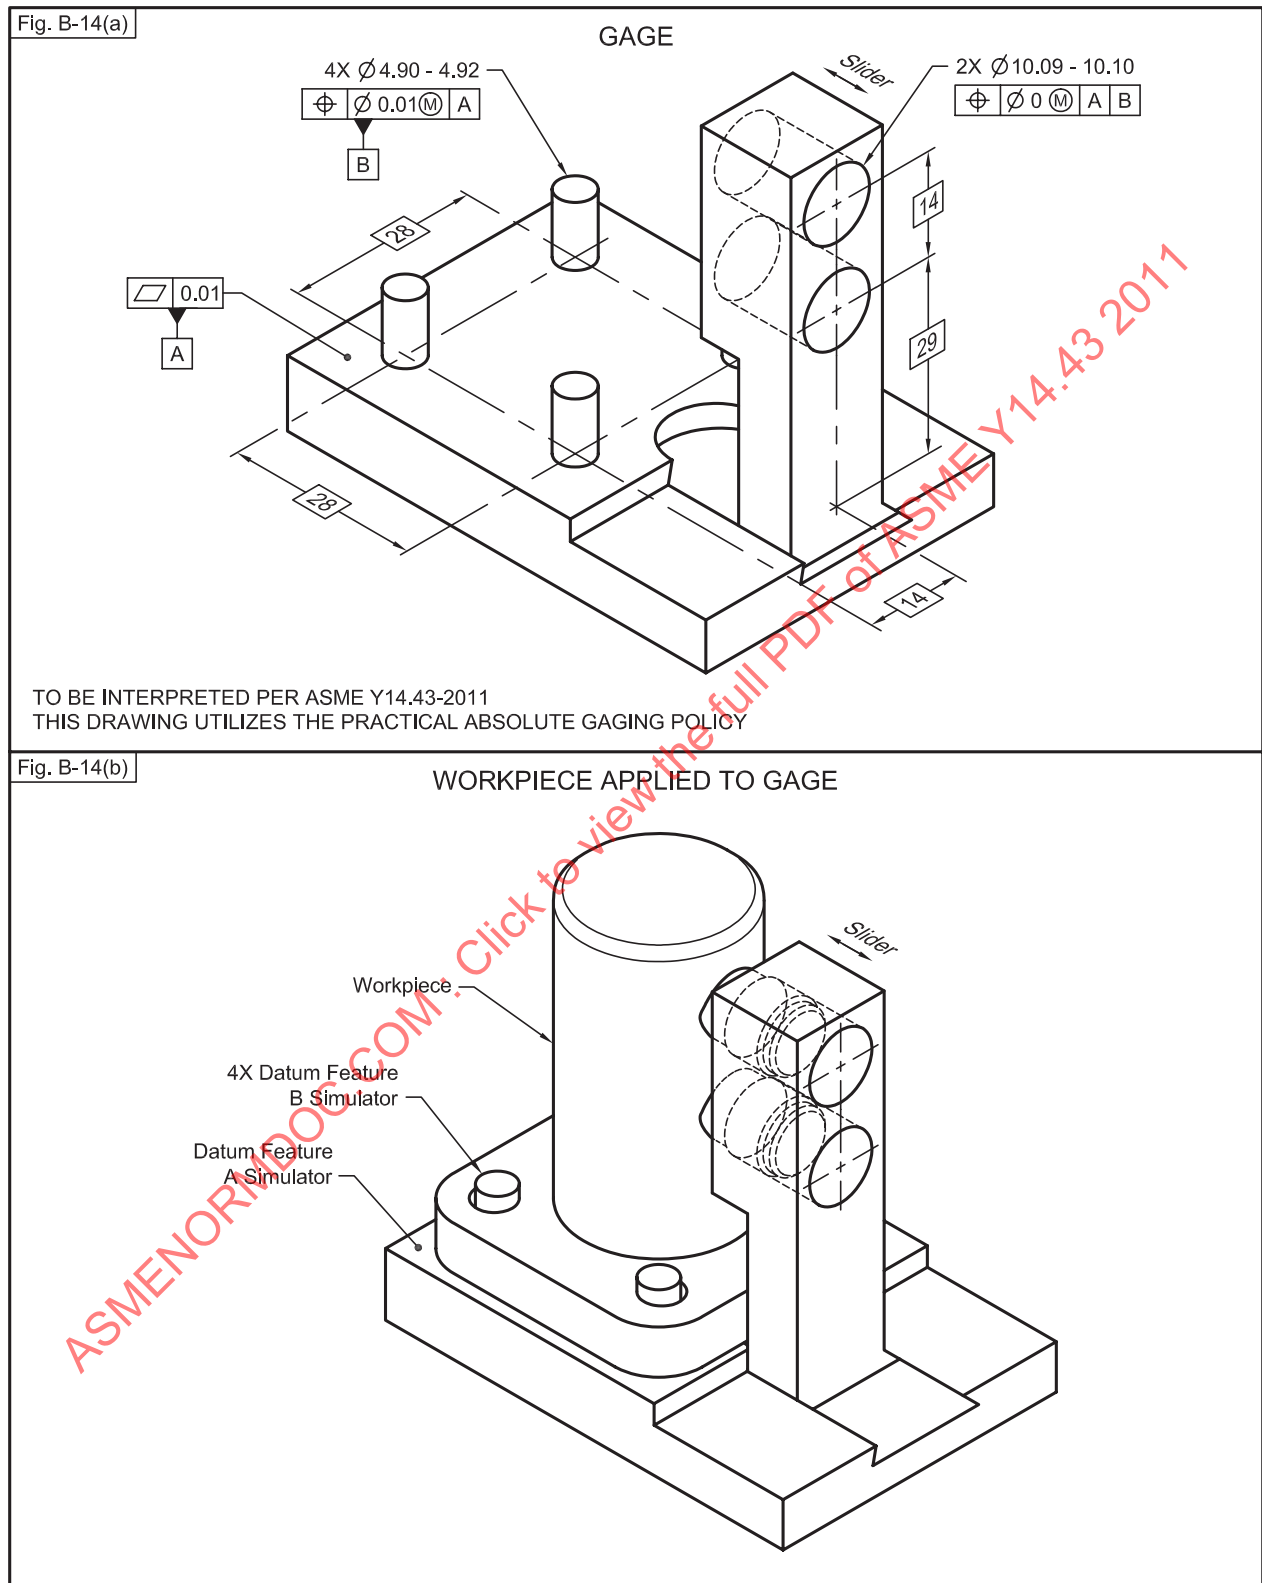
Hole Pattern as a Datum (Cont'd)
